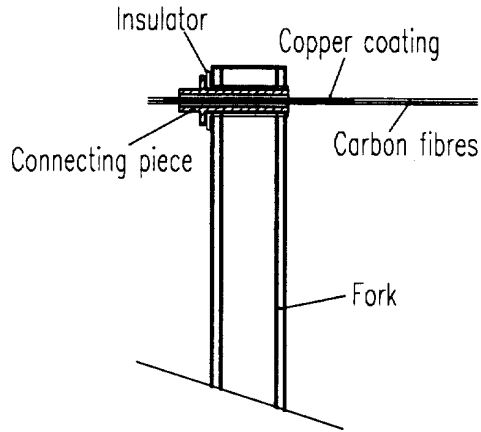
The extremity of one of the prongs, showing the wire fastening
